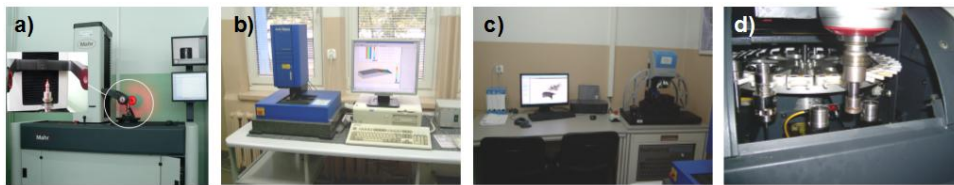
Examples of test methods used for measurement wheel wear: a) measurement on CNC edge finder, b) measurement of wheel inner radius on 3D surface scanner, c) measurement of wheel inner radius on InfiniteFocus Real 3D microscope, d) measurement on laser gate installed on the machine Ultrasonic 20 linear
